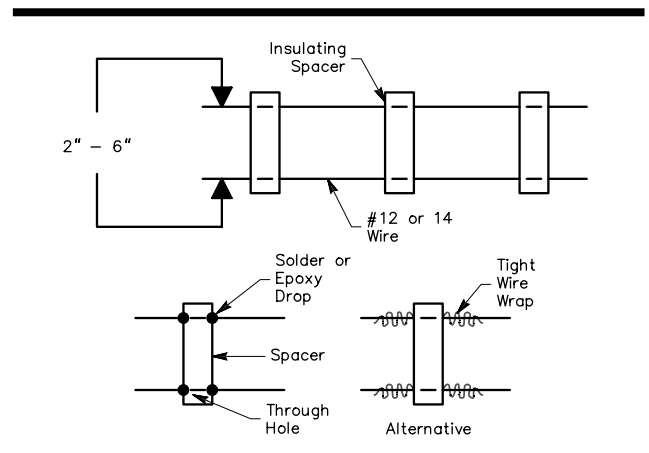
Typical open-wire line construction. The spacers may be held in place by beads of solder or epoxy cement. Wire wraps can also be used, as shown.
